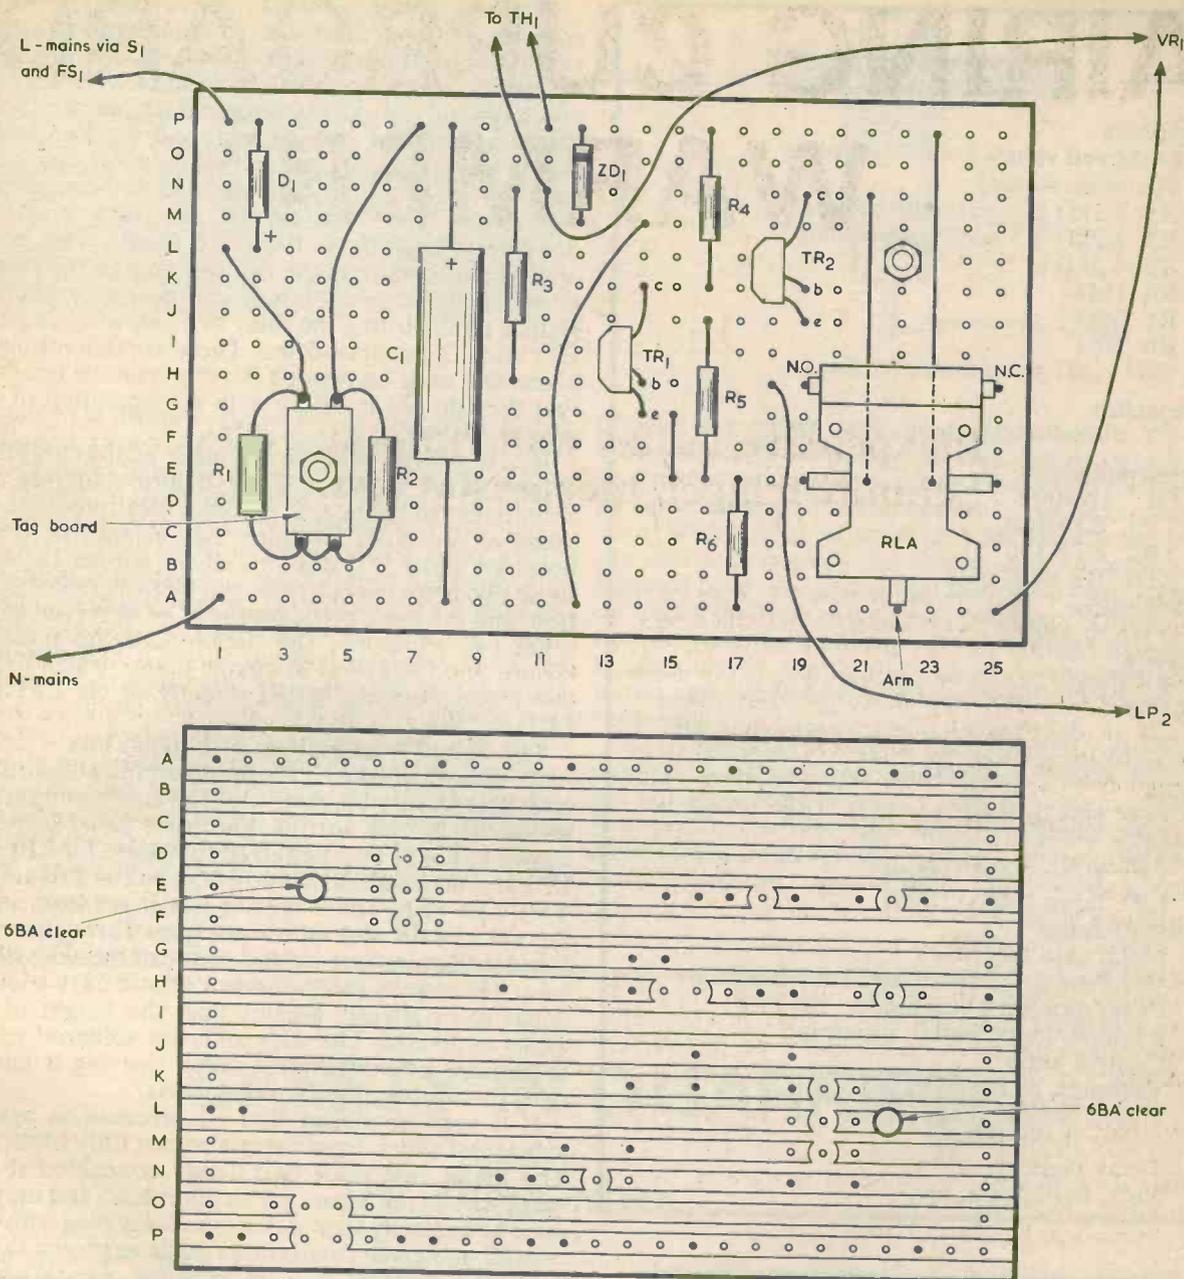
The relay is soldered directly to the Veroboard panel, as also are most of the other components. Veropins suitable for 0.15in. Veroboard are employed at the connection points to parts external to the board. Fig.1 should be followed for circuit details not shown here.
